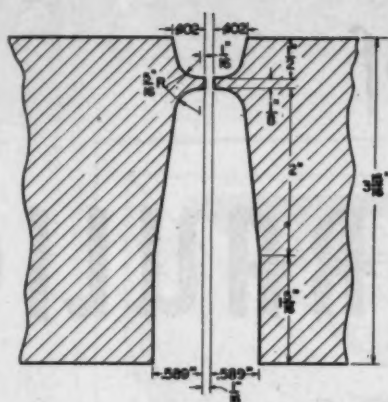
Left - Detail of weld groove for all seams of vessel
